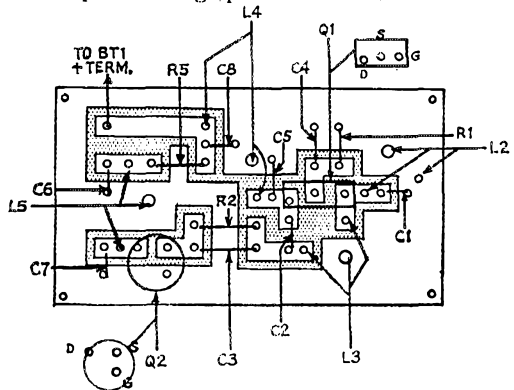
A half-scale drawing of the etched-circuit board showing placements of the parts. All coils are mounted under the board (copper side and inside the Minibox) as are C₁, C₅, C₆, and C₇. See text for location of S₁, J₁, J₂, and BT₁. All other components mount on phenolic side of the circuit board as shown in the photo.
